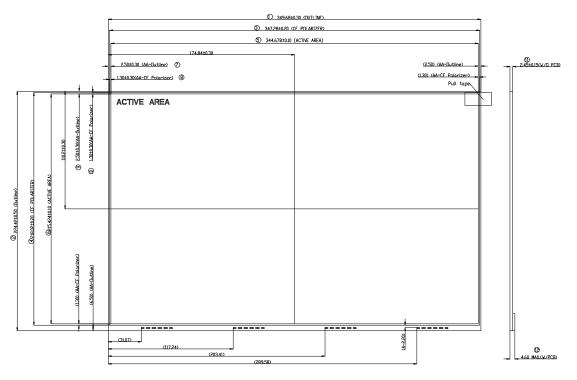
TFT-LCD Module Outline Dimension (Front View)
